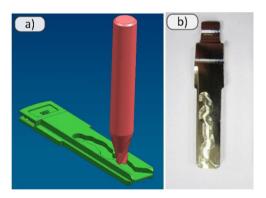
a) CAD-CAM example of code cutting operation; b) Example of a finished sidewinder key.
